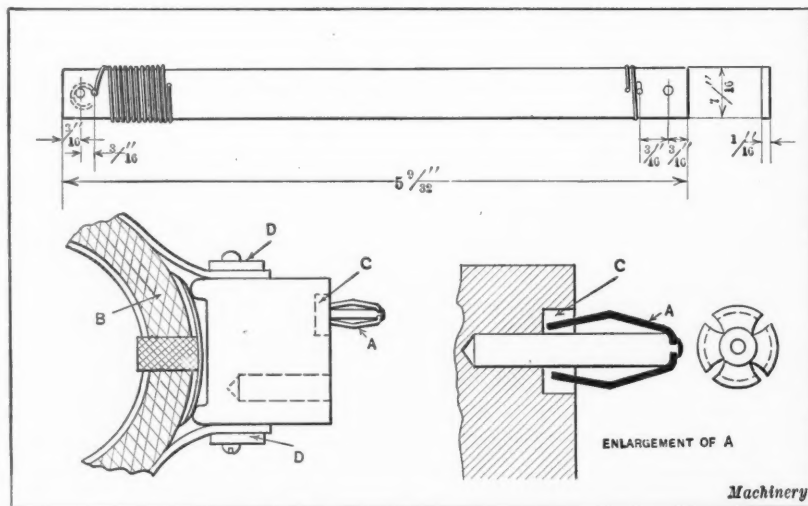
(Above) Fiber Strip for Rheostat Coil Winding; (Below) Honeycomb Coil and Enlargement of its Spring Contact "Plug-in"
